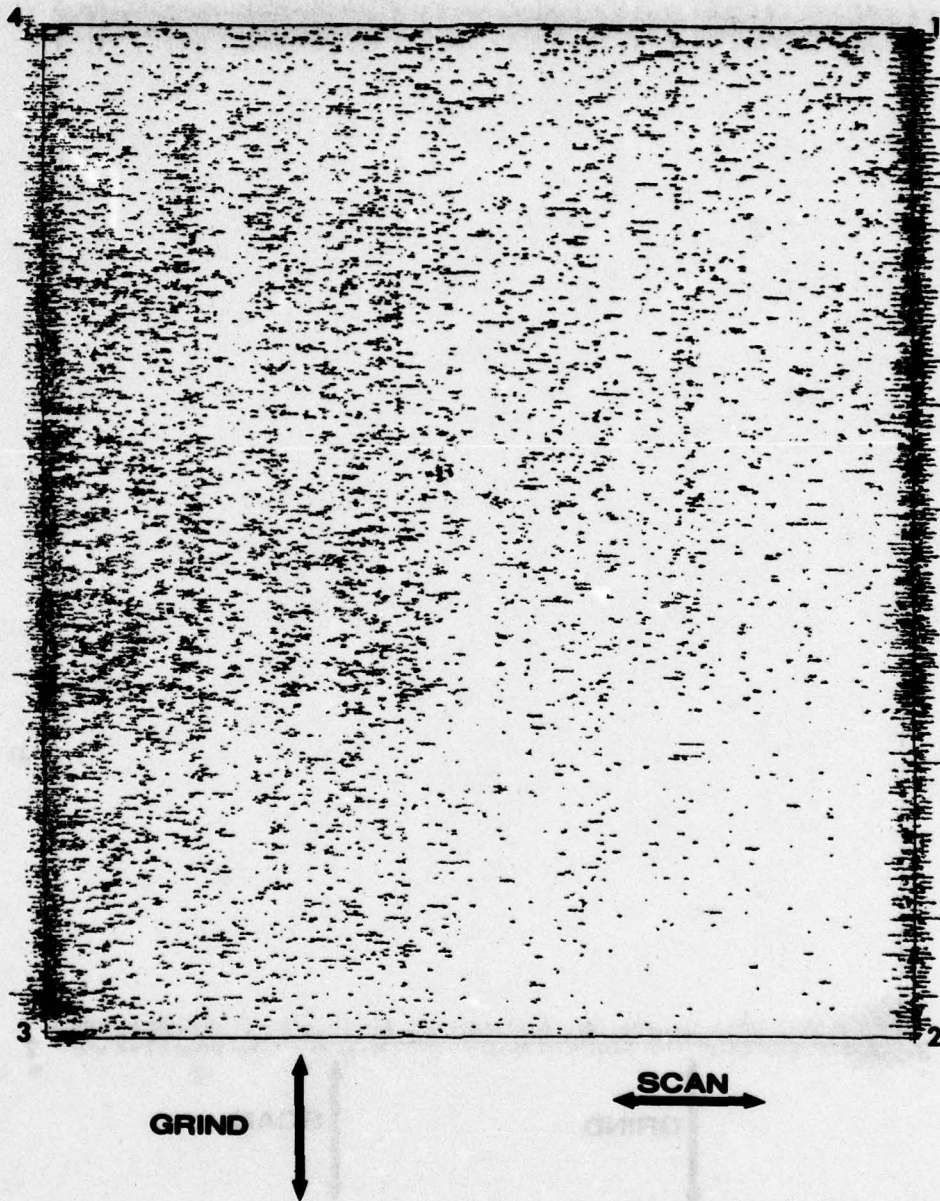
C-scan Recording of 45 MHz, 18° Surface Wave Inspection of Bottom Surface of Billet of Ceralloy 146 HPSiC (Scan Perpendicular to Grinding Direction).
